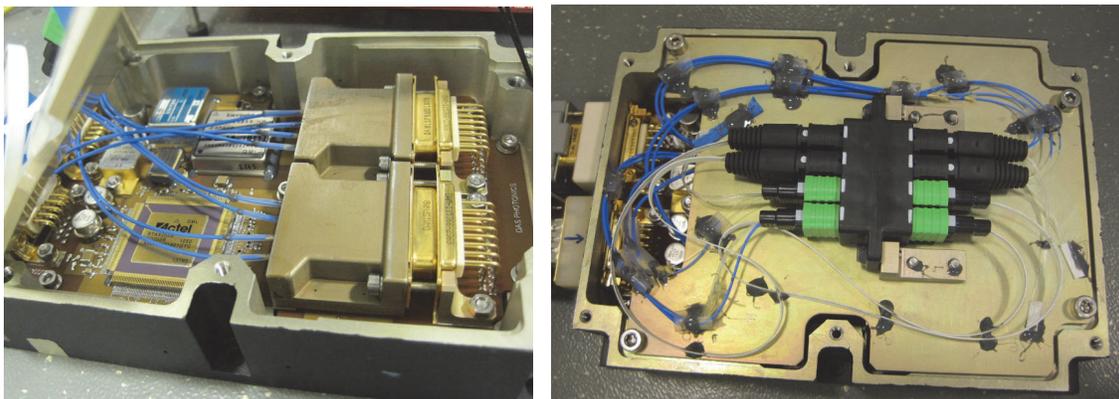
Electronics and SIOS modules (left), optical assembly and fiber routing on the upper layer (right).
